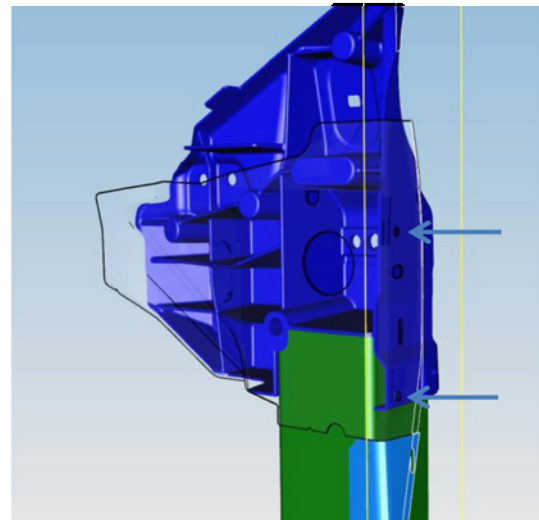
MMLV hinge pillar casting one sided joining with flow drill screws
